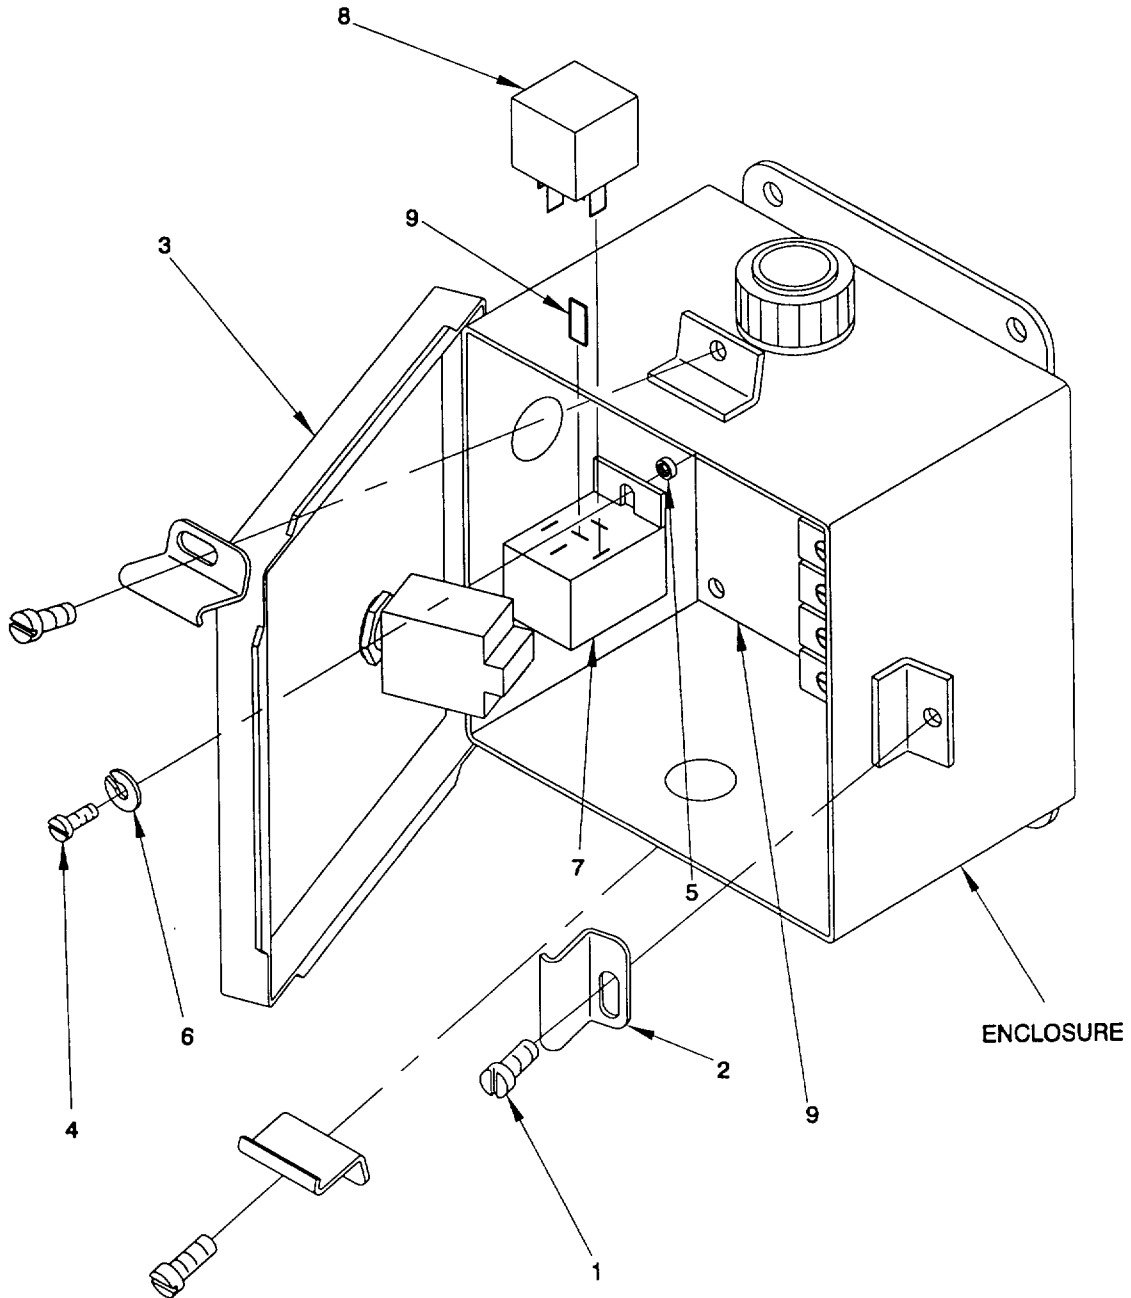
Relay, Relay Terminal, Relay Socket, Single Bilge Pump Control Assy. "A7", Remove/install
